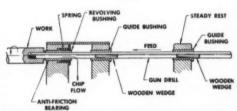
More important details in connection with drill guide bushings. Revolving guide bushing is forced against work piece under spring pressure and revolves with the work. Wooden wedges are driven into the guide bushings to dampen drill vibrations.
